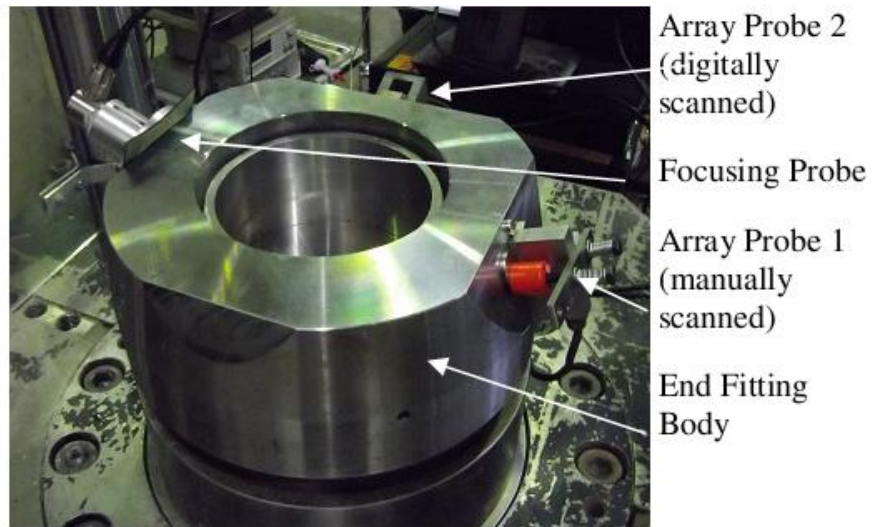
The complete end fitting assembly with three ultrasonic transducers.
